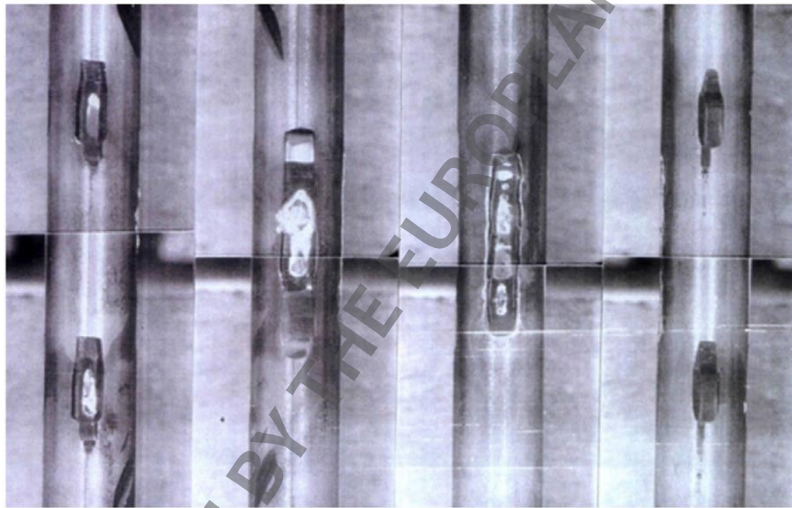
Perforated grid-to-rod fretting wear configurations of failed KOFA fuel rods [7].
